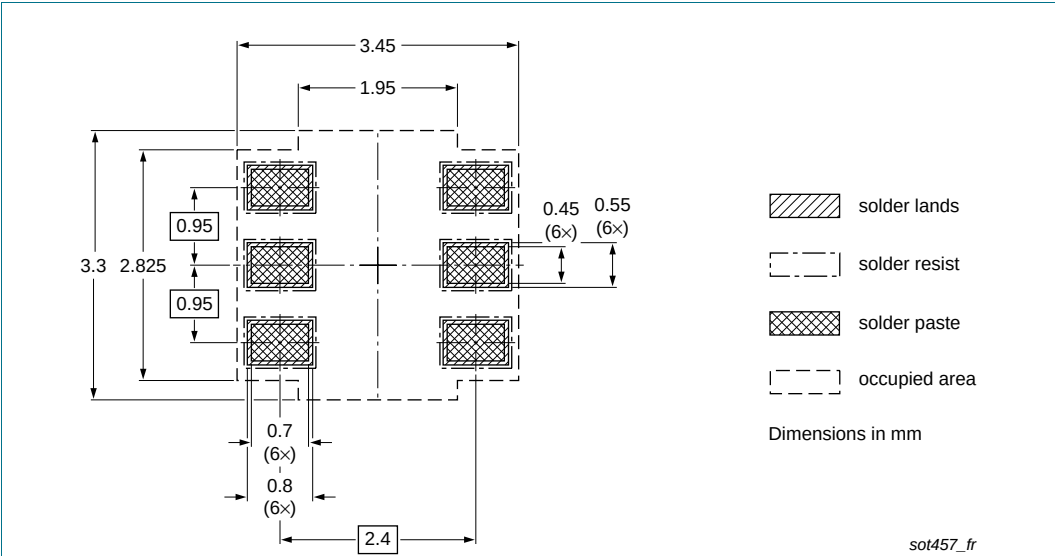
Reflow soldering footprint SOT457 (SC-74)
